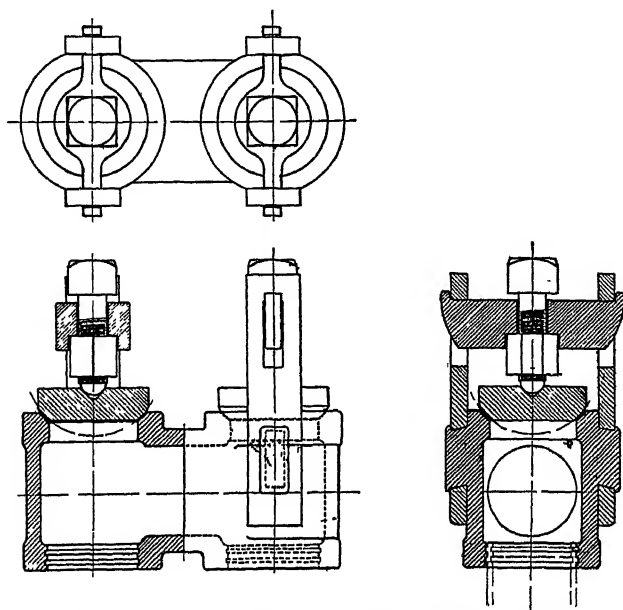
JOINT BETWEEN A TUBE AND RETURN HEADER
